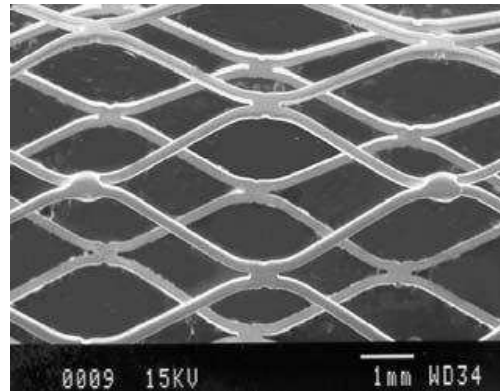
Memotherm stent (Bard Angiomed) made from sheet (note welded struts) [STO.04]
